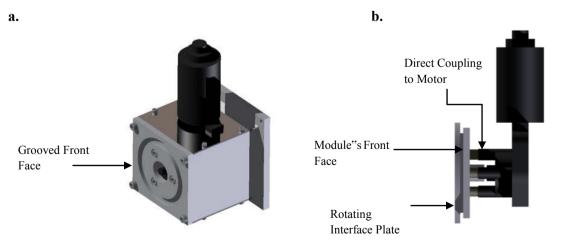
Drive Mechanism of the Cutting Head Rotary Module
